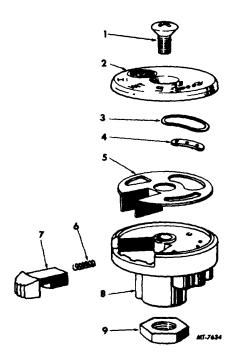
Air Shift Control Valve (Exploded View - Type A).
